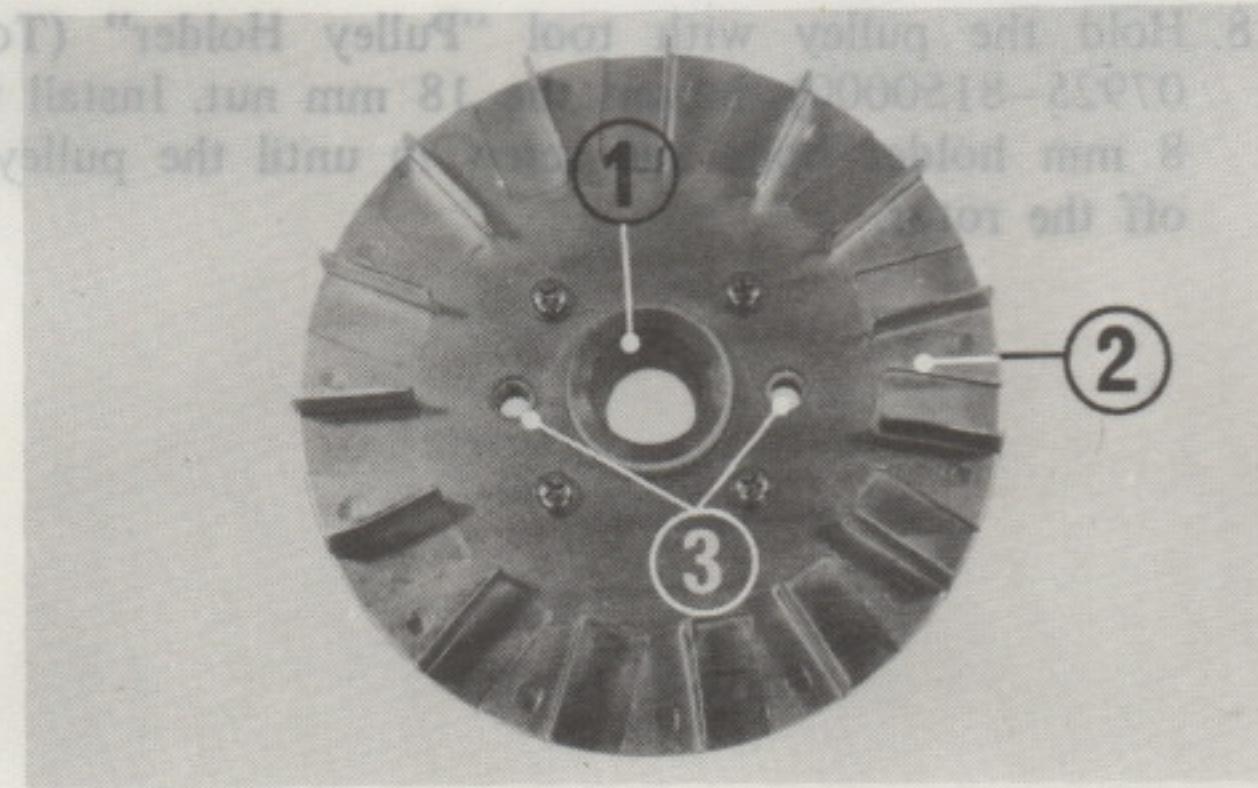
(1) Driven pulley (2) Fan (3) 8mm screw hole
